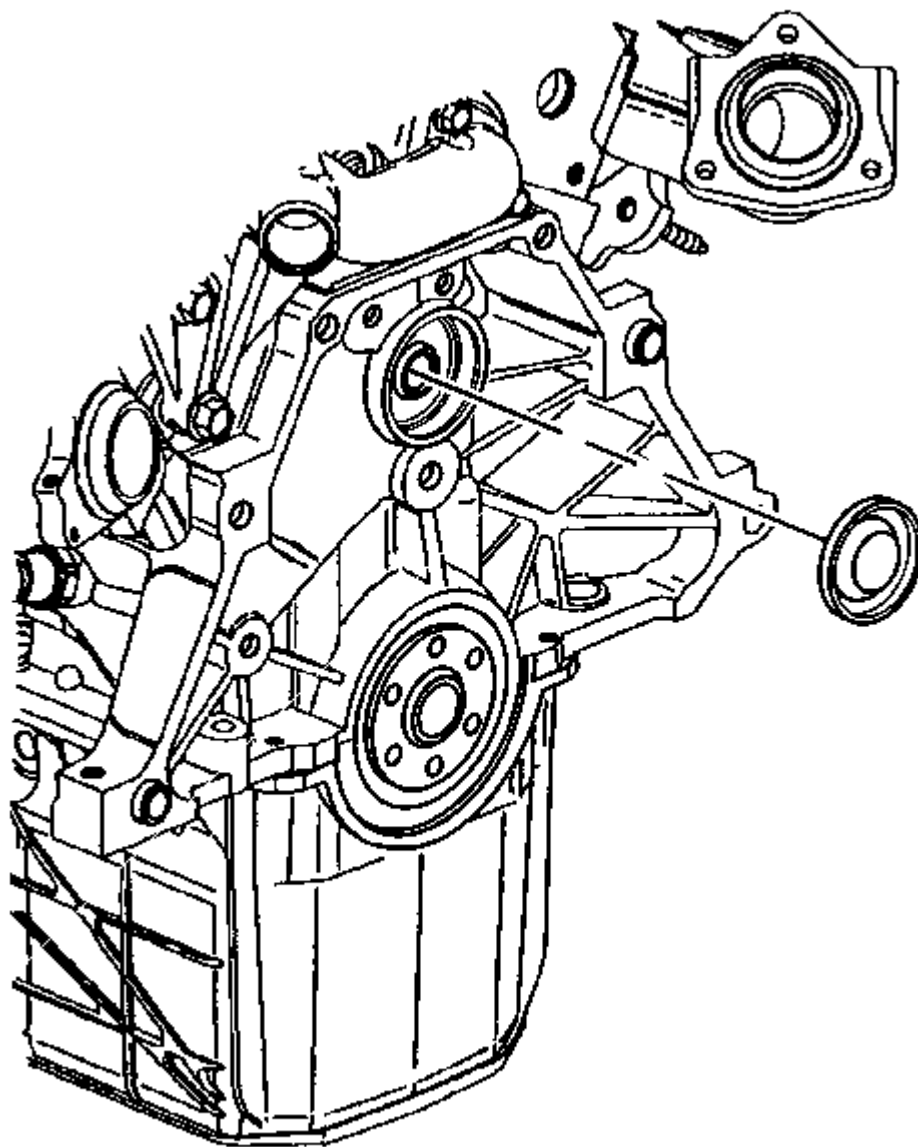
View Of Camshaft Rear Bearing Hole Plug
